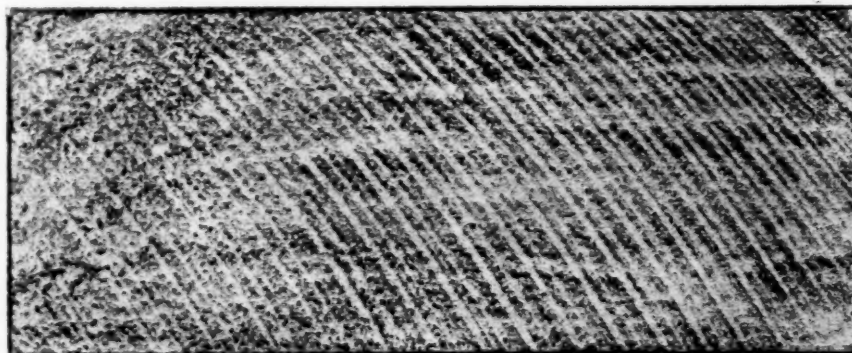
HIGH-SPEED SAW (MITER SAW) CROSS-CUT ON CHERRY PLANK. UNIFORM RATE OF FEED AT ABOUT 75 FT. PER MIN.
